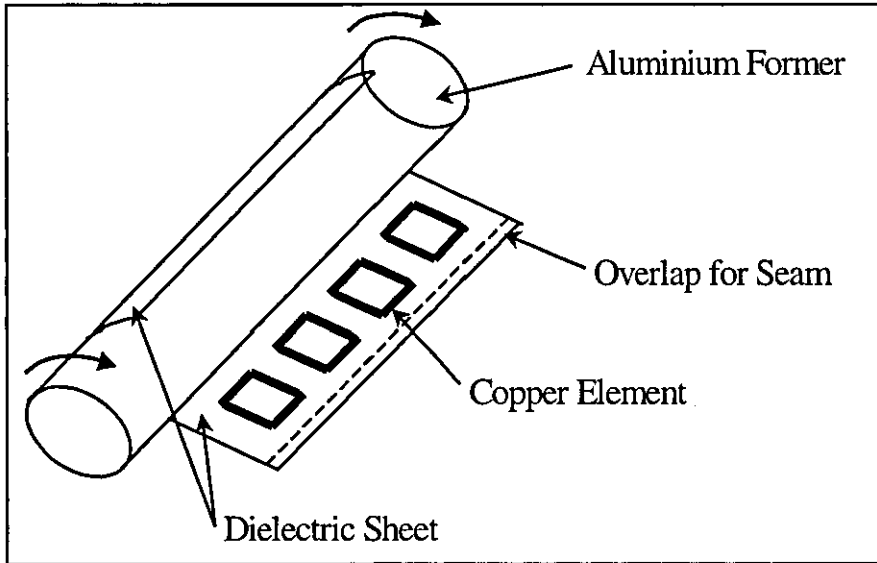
FSS sheet being rolled on its former to make an FSG.
